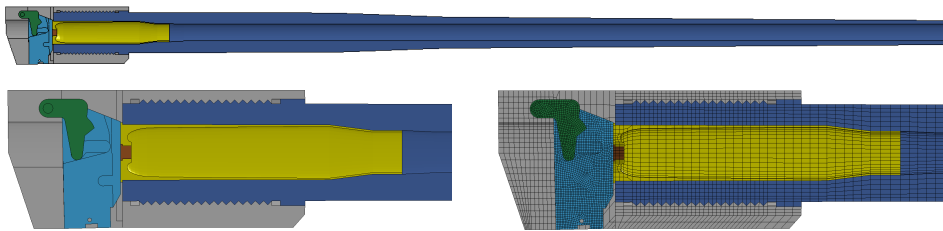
Cross section of the gun with detail of the breech mechanism (left) and finite element mesh (right)
